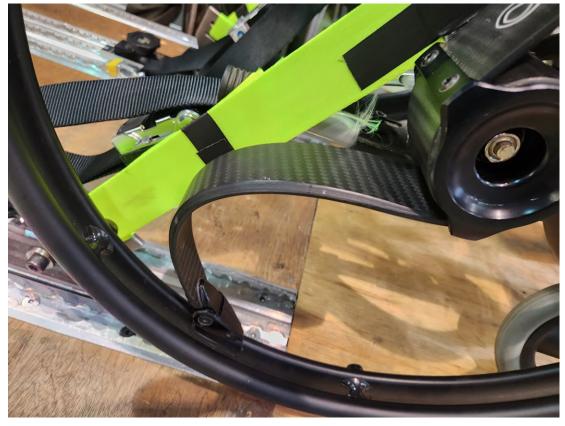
RH lower inner wheel spoke attachment RH side view, post-test
